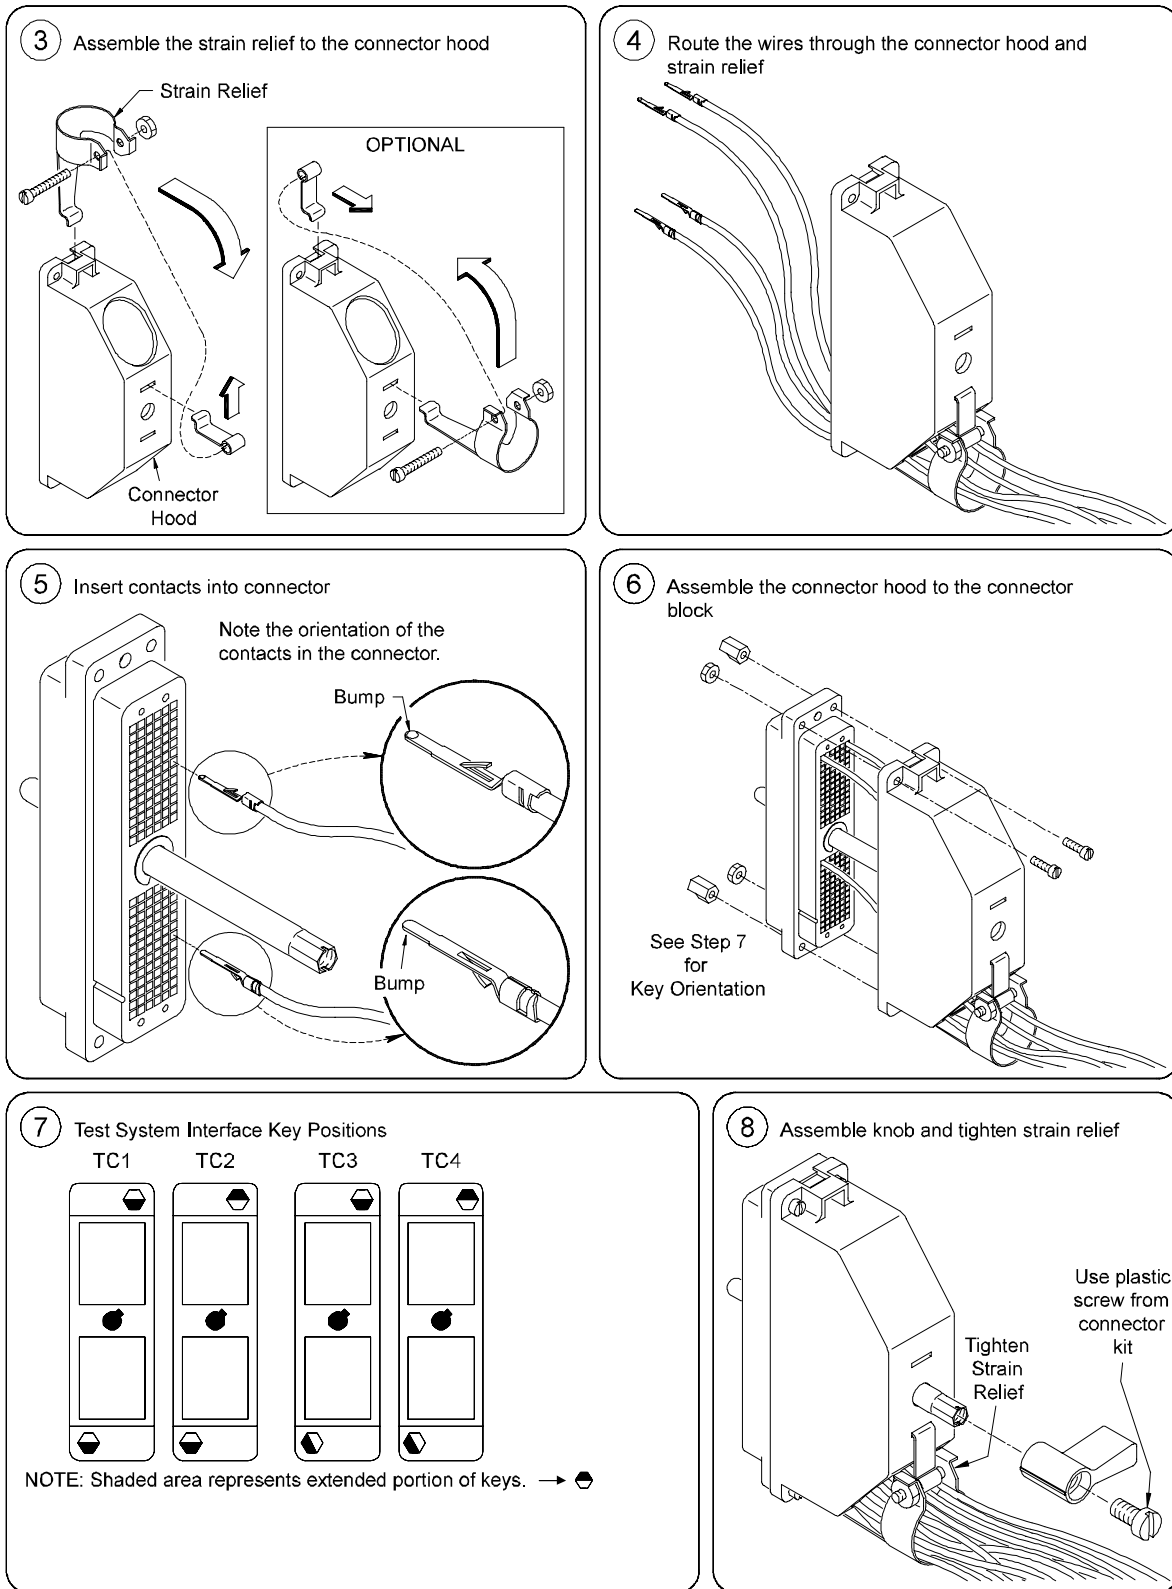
Assembling TC1 - TC4 Mating Connectors
